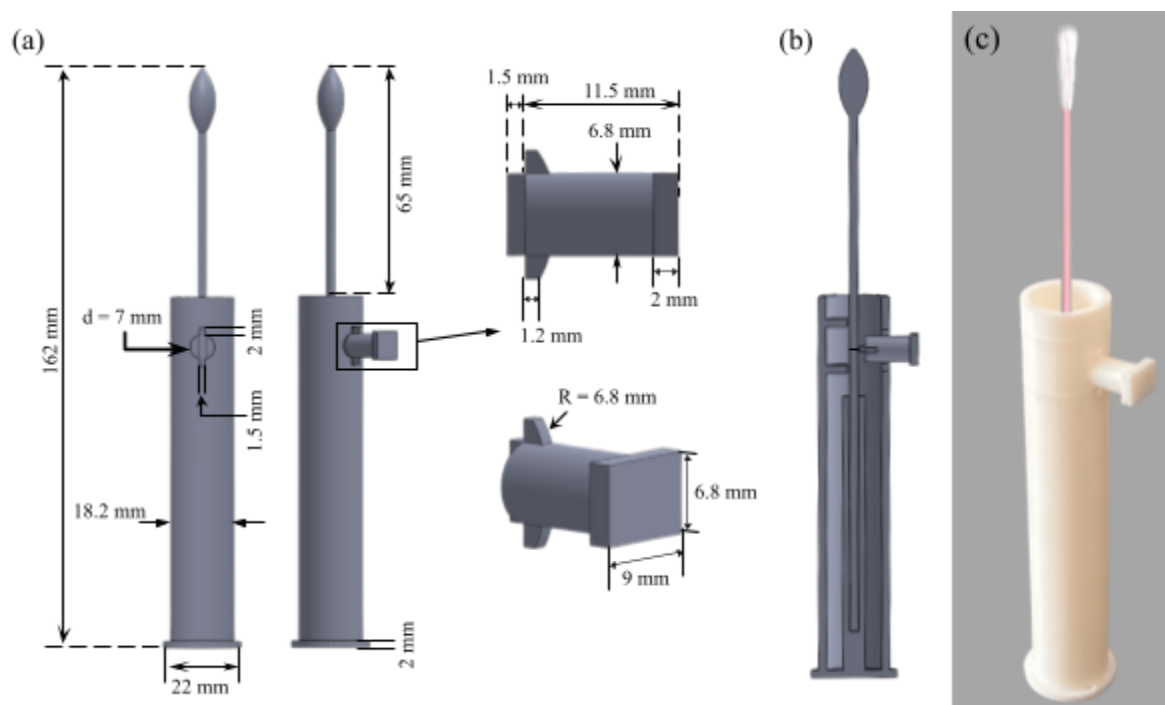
(a) Dimensioned images of the final specimen collection device including the external casing and keyed push-button. (b) Section view of specimen collection device illustrating the three-point bending mechanism. (c) Image of 3D printed specimen collection device housing the Dacron swab.
